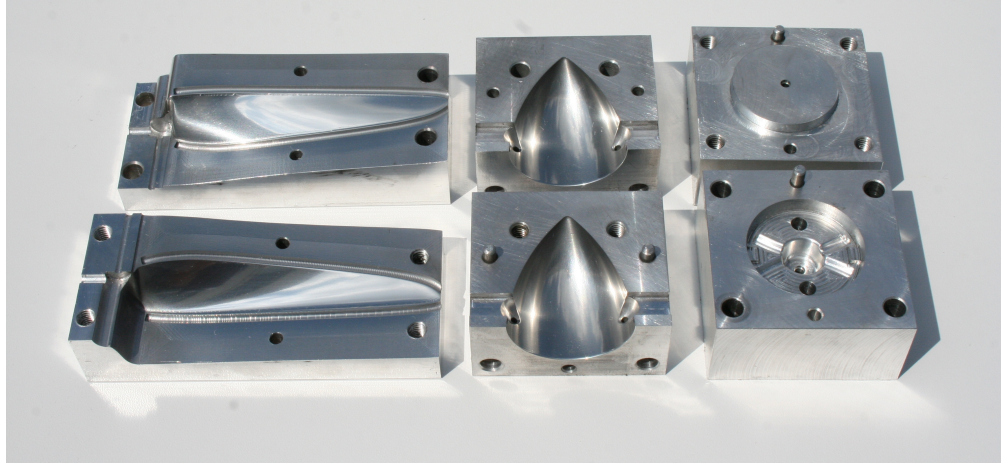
CNC manufactured aluminium propeller and spinner moulds
